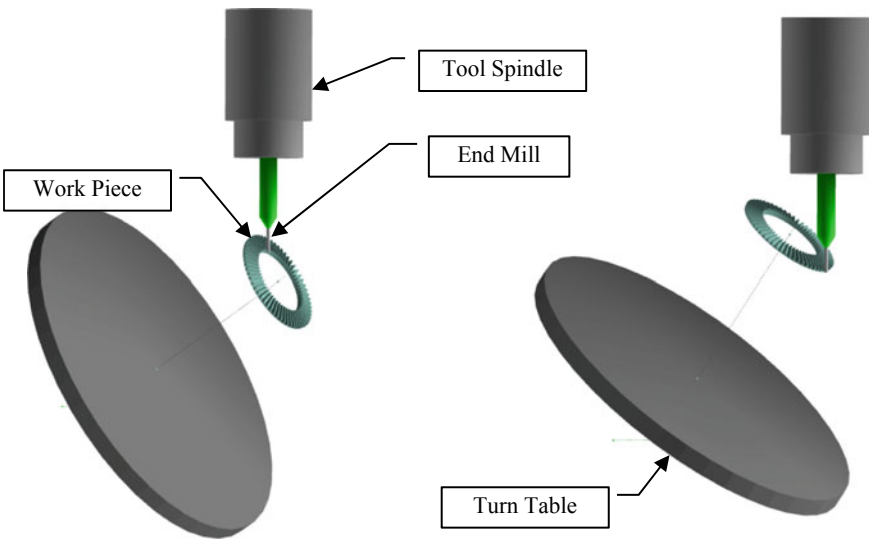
“AC” type CnC machine limits for Toe/Heel chamfering—large pitch cone angle bevel gear
